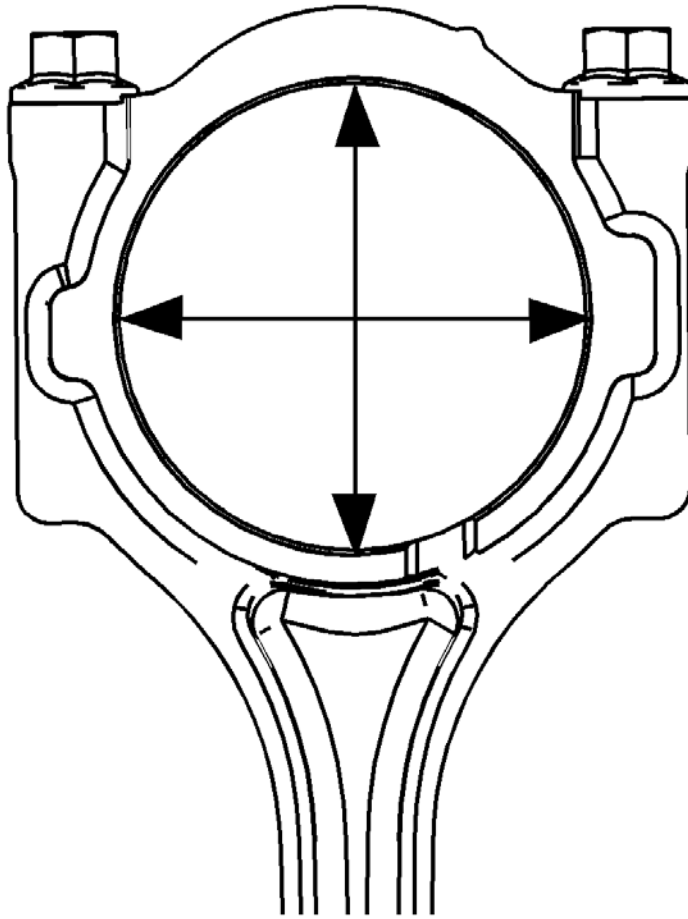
Measuring Connecting Rod Crankshaft Bearing Bore
